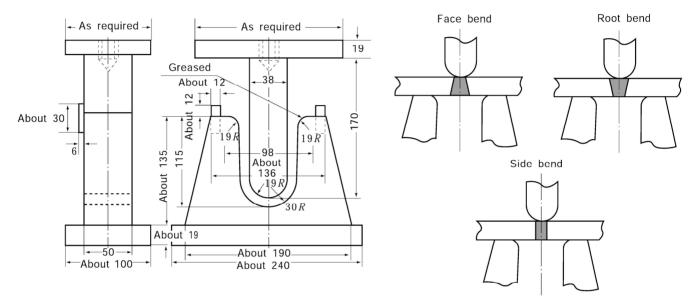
Guided Bend Test Jig (For 9 mm in thick., Unit : mm)
